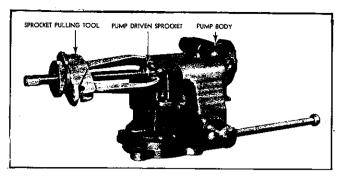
Pulling Drive Sprocket from Oil Pump Shaft.
